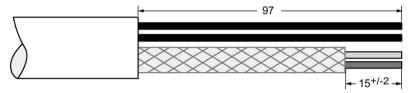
Stripping dimensions for PROFIBUS Hybrid cables
